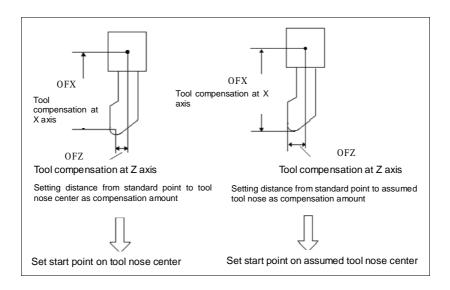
Setting of Tool Offset Value if Taking Tool Center as Standard Point
